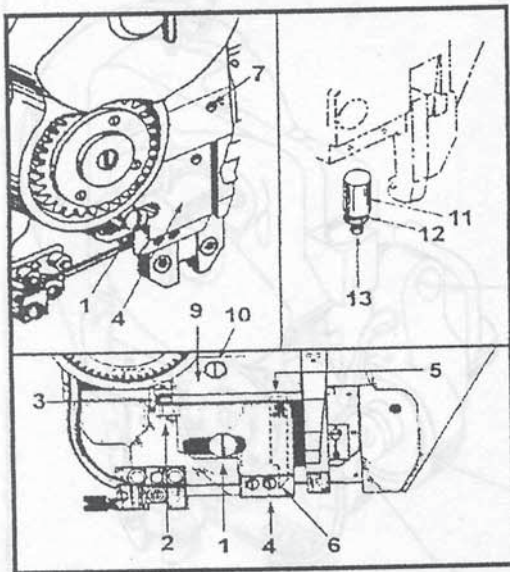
Staple Left Leg and Movable Cutter Adjustment
